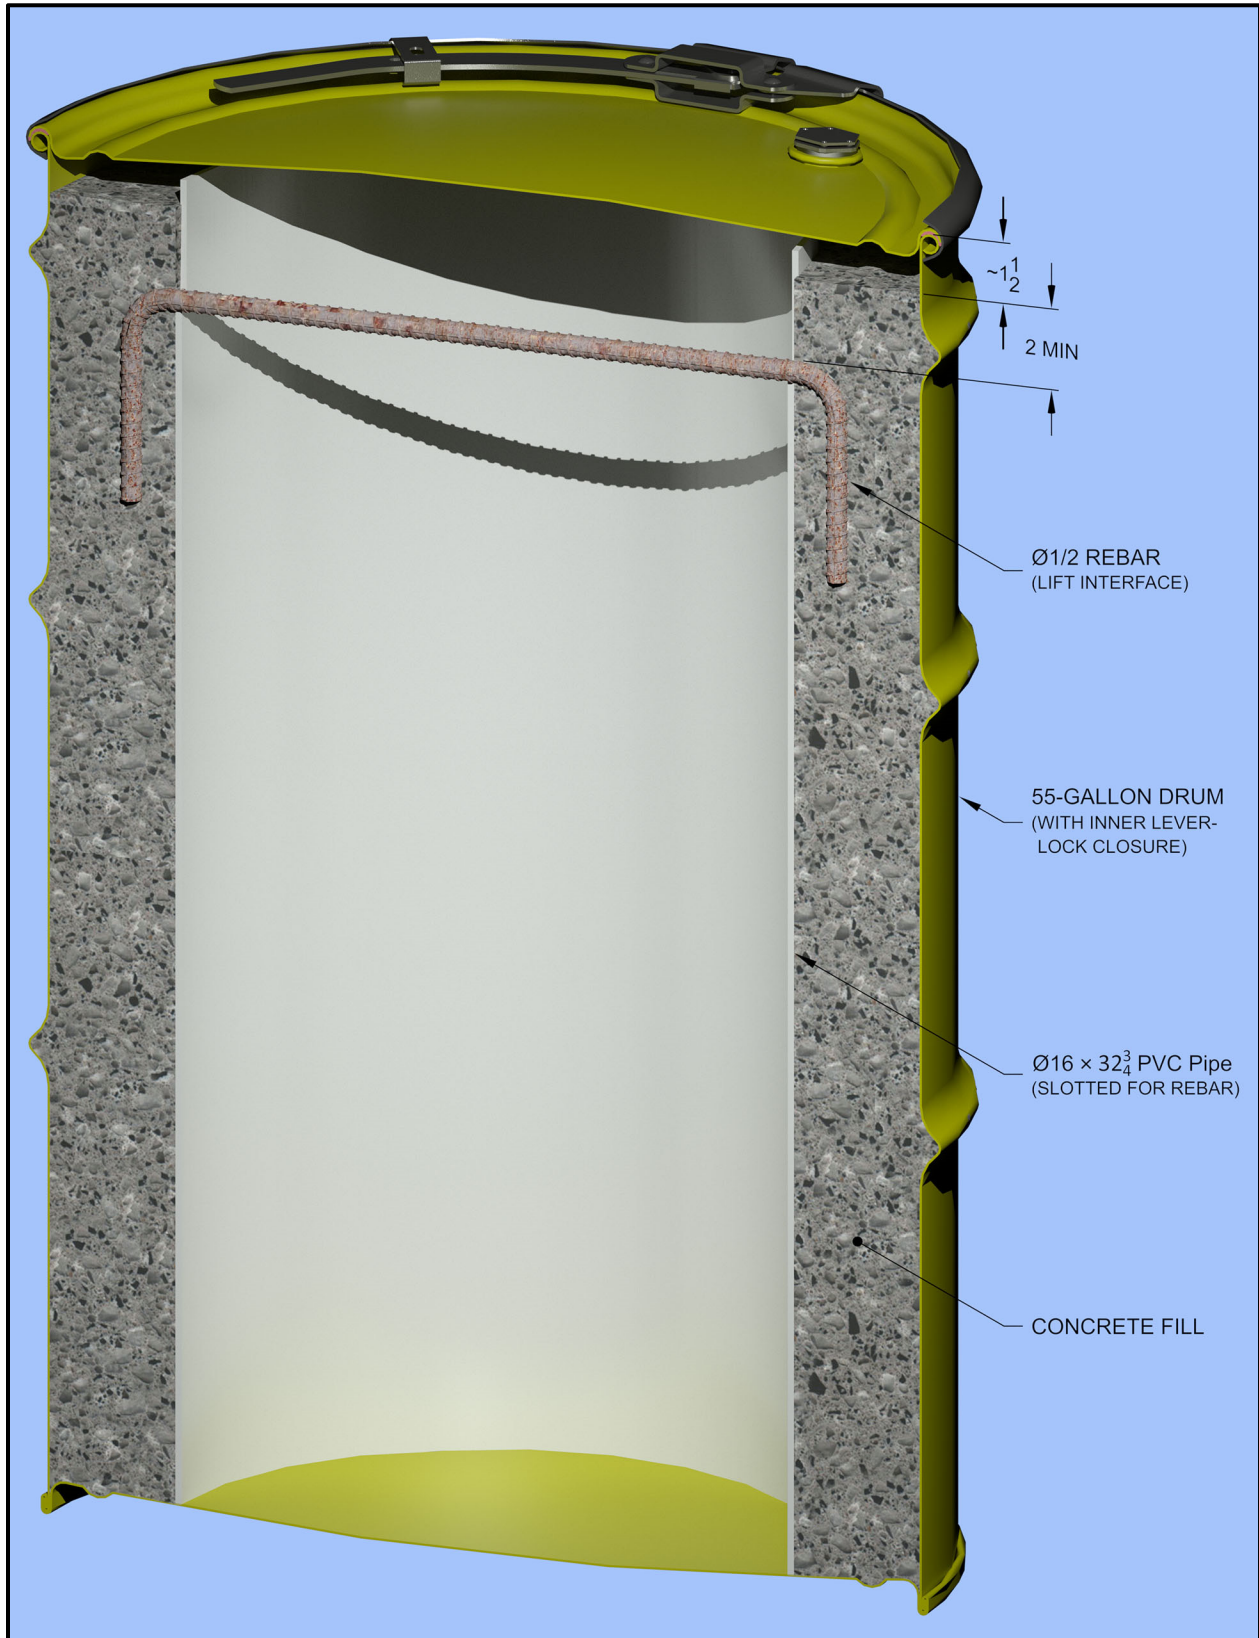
55-Gallon Payload Drum with Concrete Ballast
